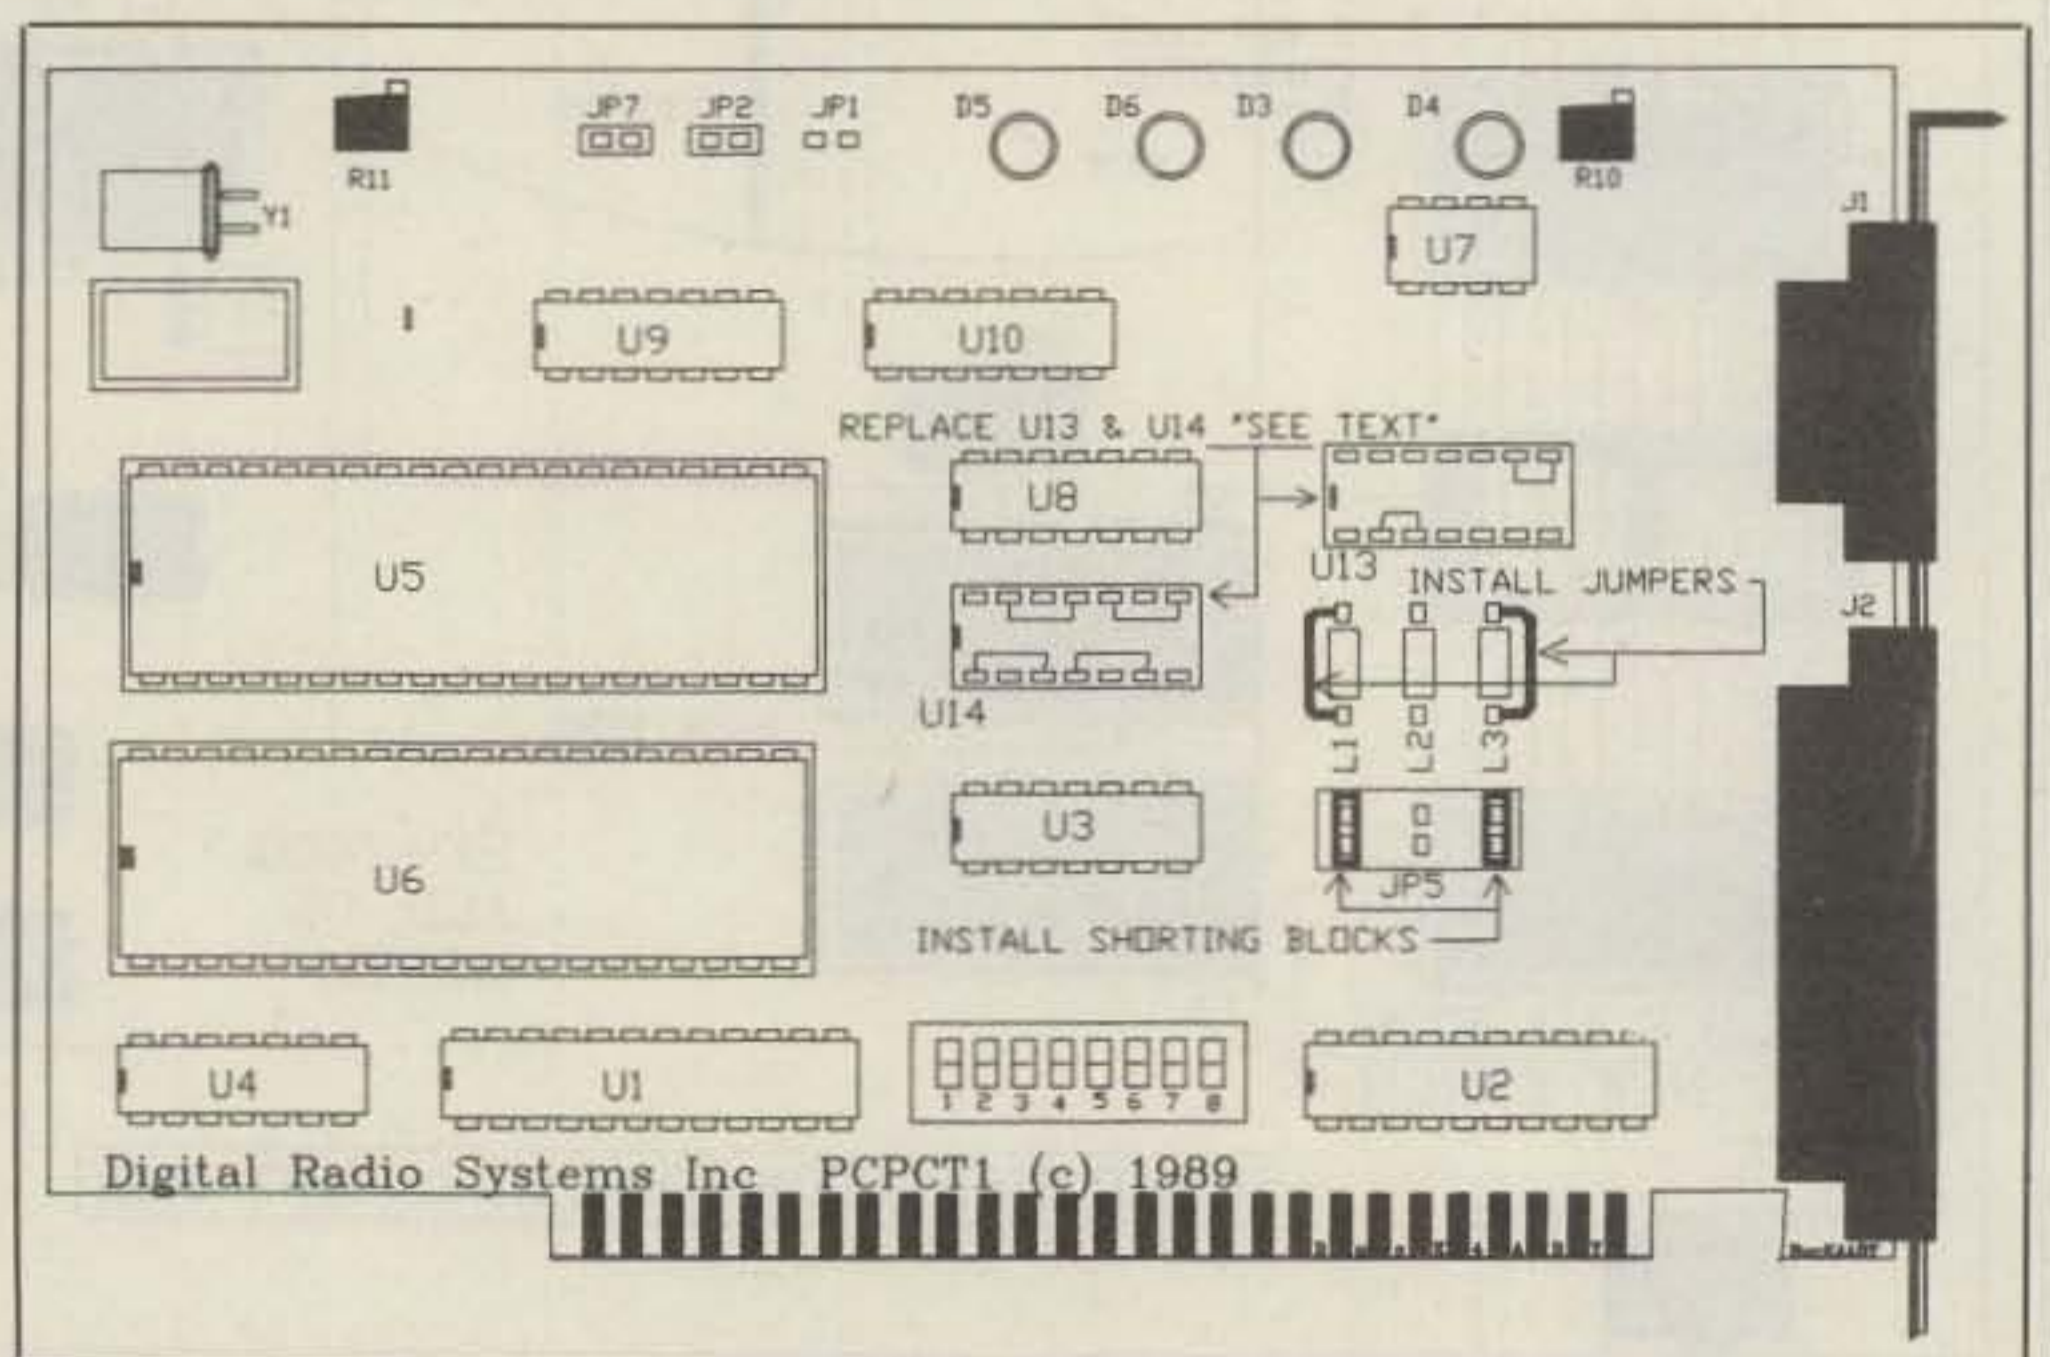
Component layout of the DRSI PCPA illustrating the location of U13, U14, L1, L3, and JP5. Note two jumper blocks are added at JP5.
